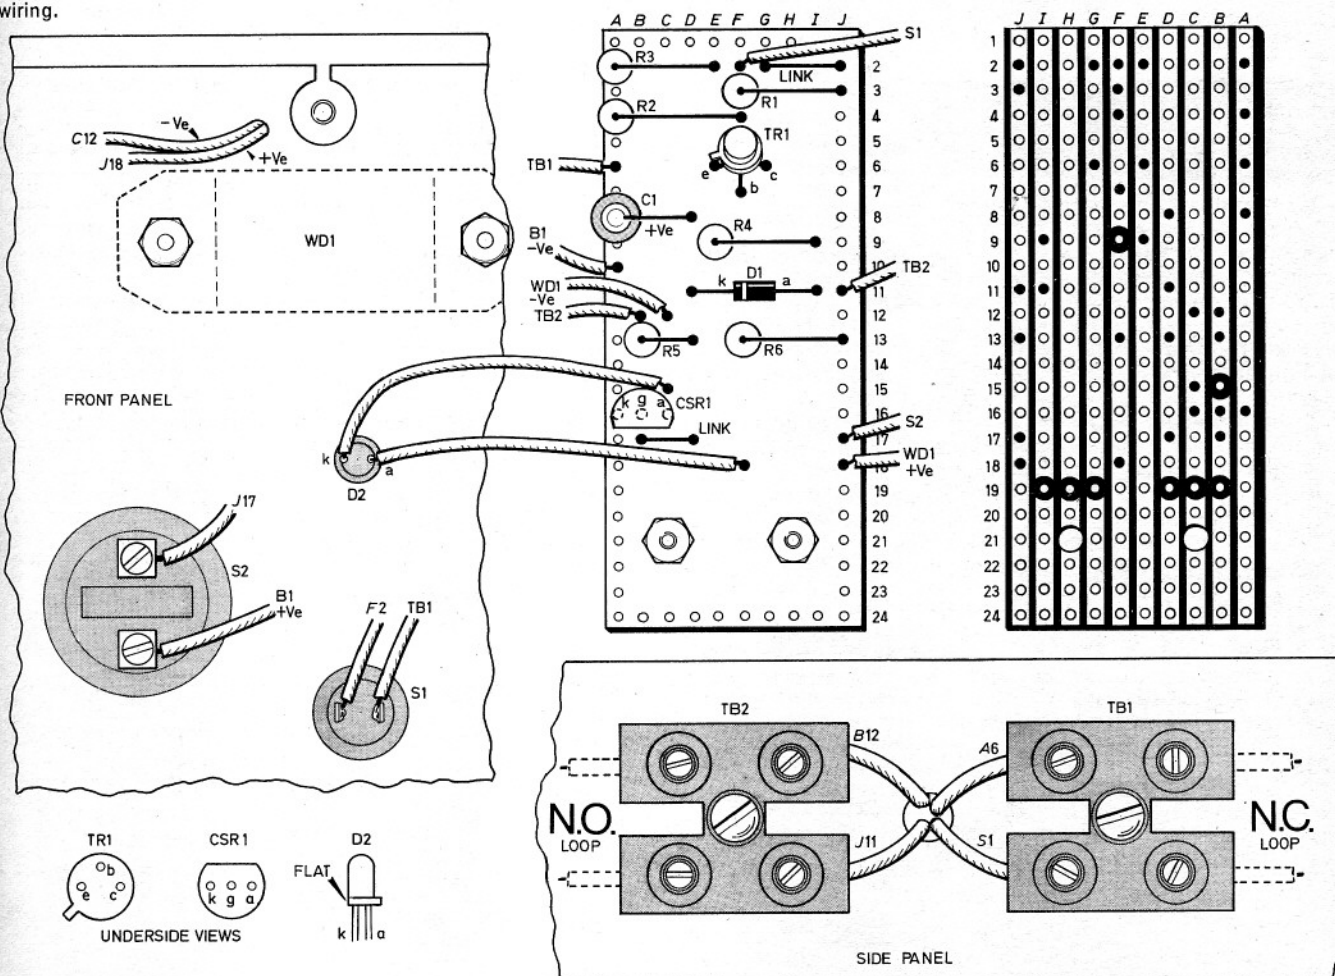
Complete construction details showing interwiring between board and case mounted components, and layout of the components on the top side of the stripboard.
